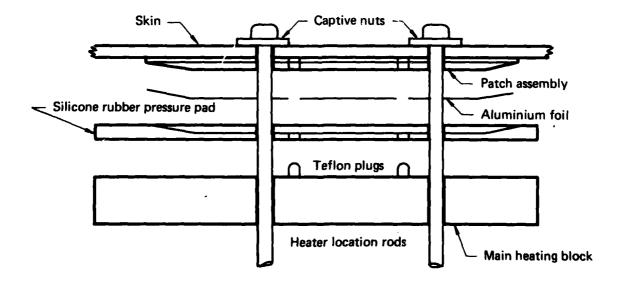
Pressurising assembly for application of the aluminium protective foil.
